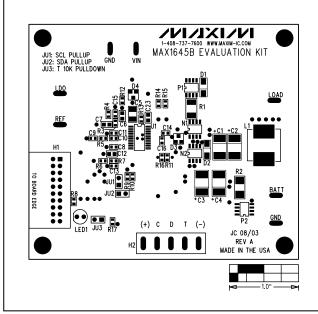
MAX1645B EV Kit Component Placement Guide— Component Side
